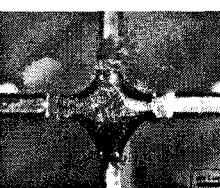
Prototype weld bead shapes of LB(Tag-w) welding for upper side
